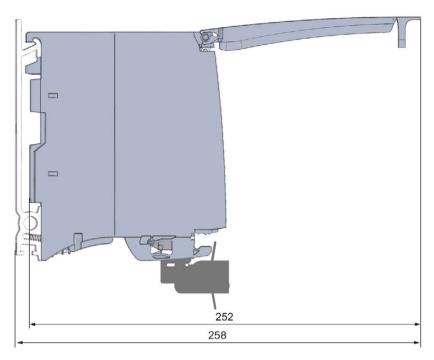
Dimension drawing of the Al 4xU/I/RTD/TC ST module, side view with open front panel
